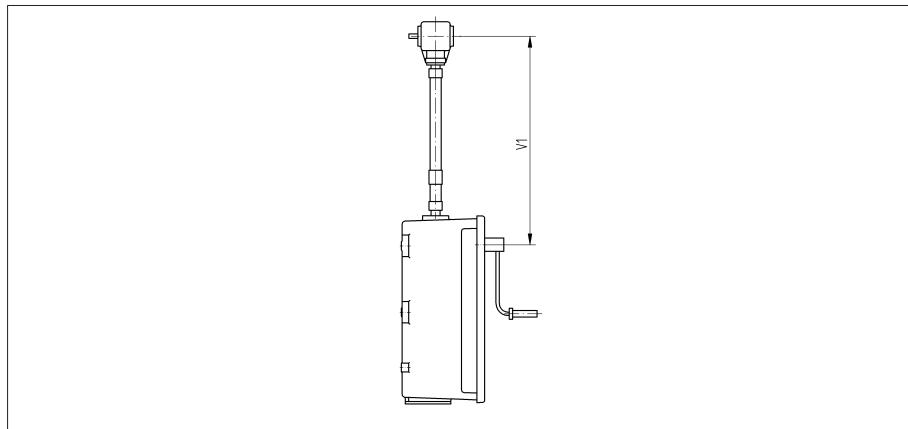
Drive shaft without cardan shaft, with insulator (= special model)
